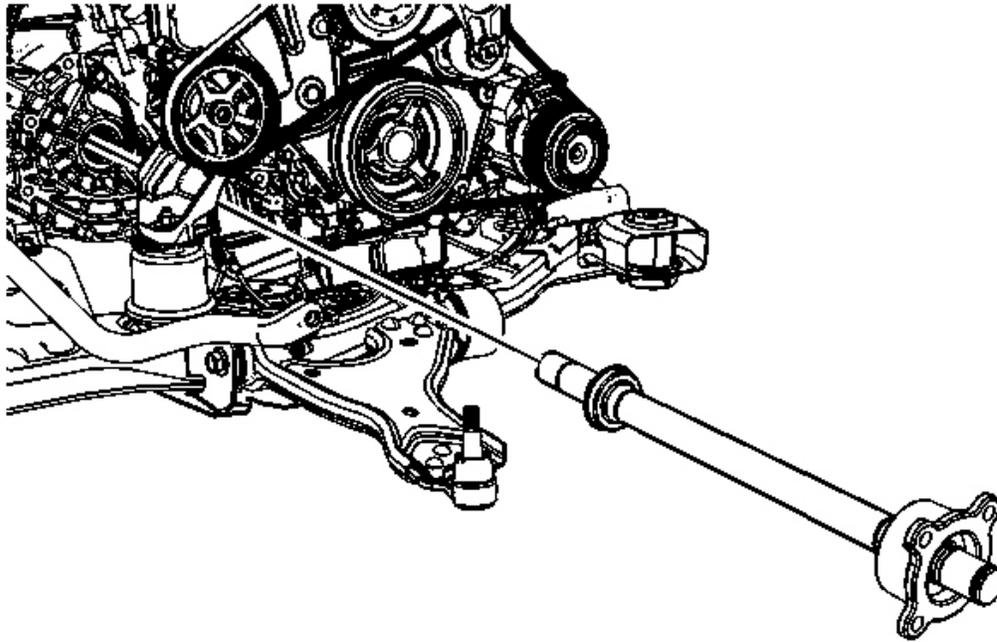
Illustrating Disengagement Of Intermediate Drive Shaft From Transaxle
